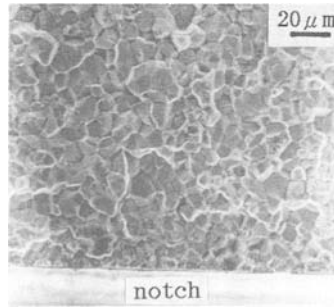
Fractograph of intergranular fracture at notch root of BD carburized specimen
